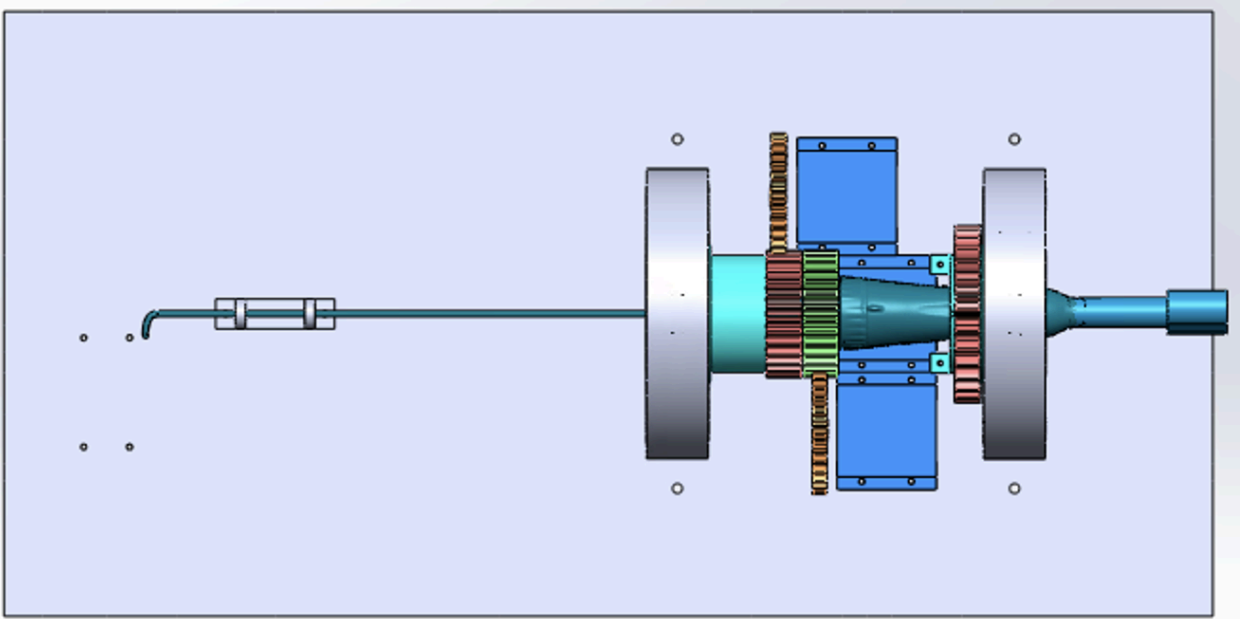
Cross-sectional top-down view of the Solidworks assembly of the robotic catheter system.
